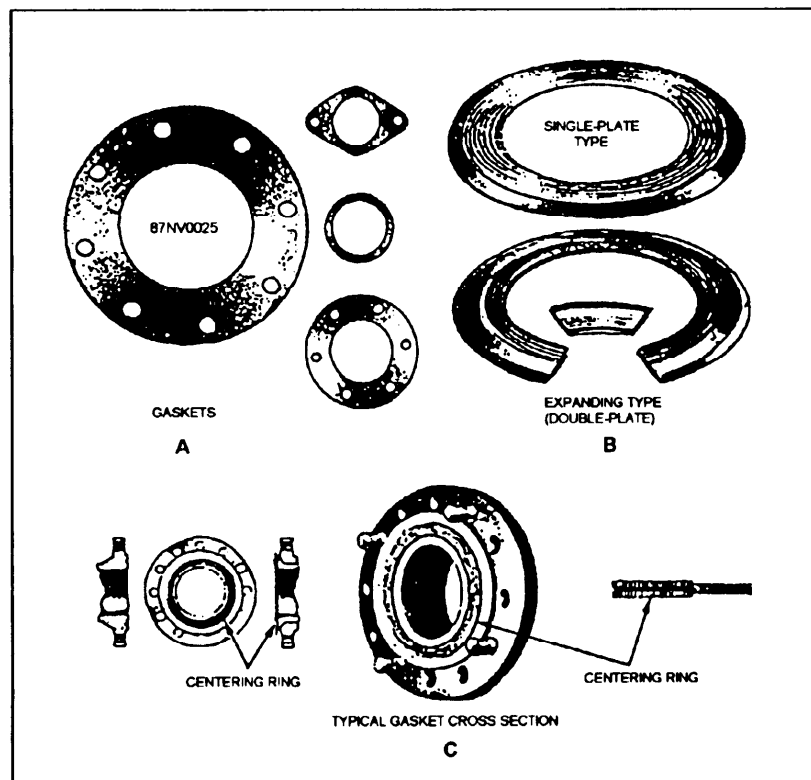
Fixed joint gaskets. A. Sheet gaskets. B. Serrated-face metal gasket. C. Spiral-wound metallic gasket.
